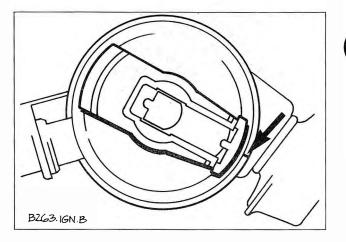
Distributor rotor aligned with No. 1 cylinder TDC mark (arrow) on distributor housing.
